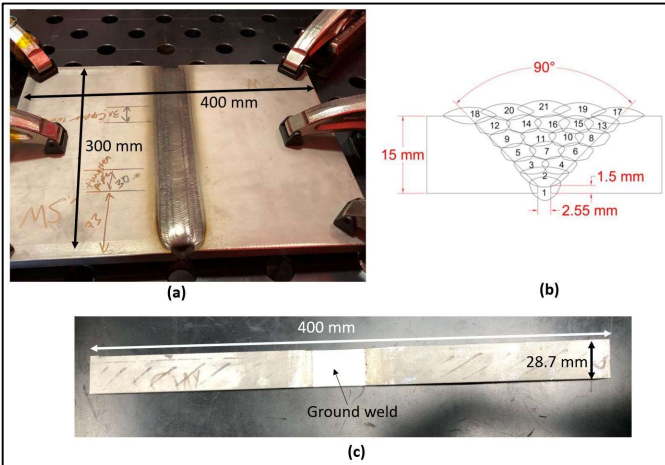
(A) WELD SAMPLE, (B) LAYOUT OF THE WELD PASSES AND (C) METAL STRIP (SPECIMEN)
